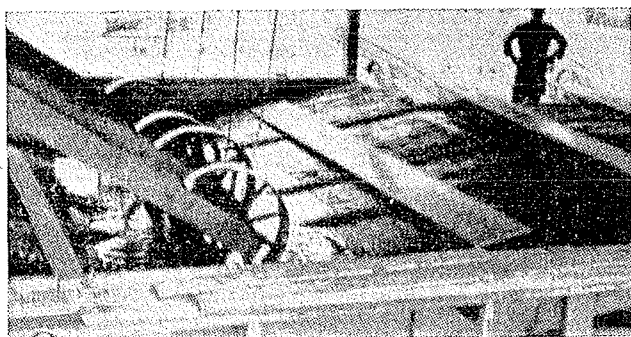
Mechanical dipping equipment showing boards passing through vat on the transfer chain.
